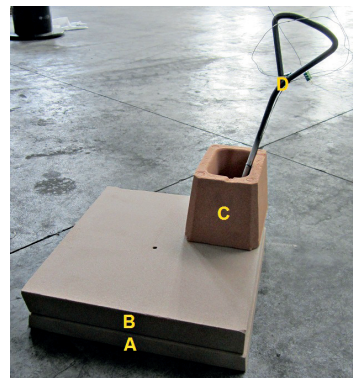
Main components of the test equipment: (A) drag, (B) cope, (C) pouring basin and (D) stopper.
